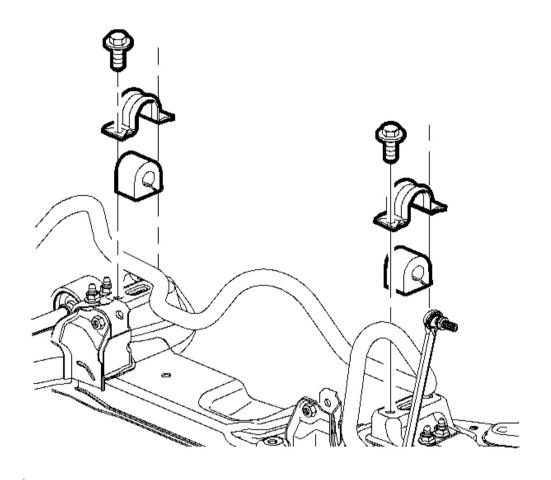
Stabilizer Bar Clamp & Cradle Bolts Courtesy of GENERAL MOTORS CORP.
